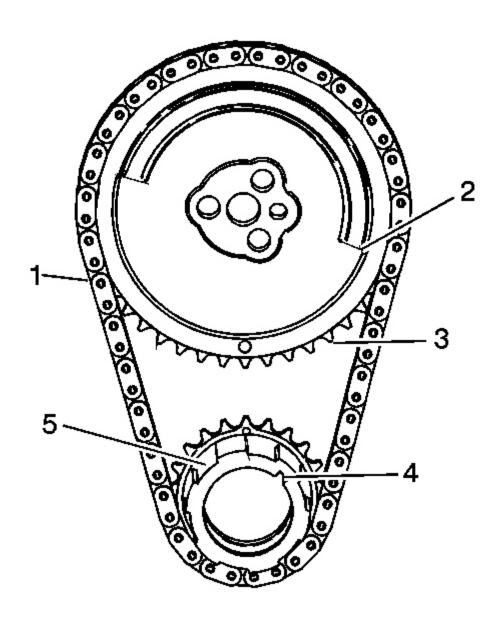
Timing Chain & Sprockets Assembly Courtesy of GENERAL MOTORS CORP.
